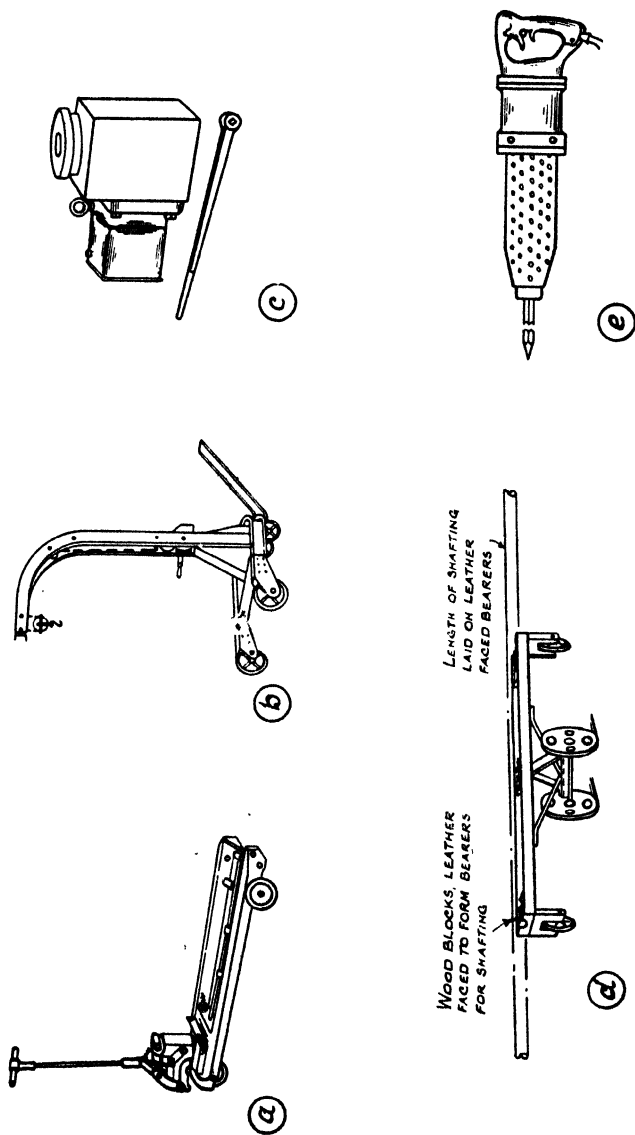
USEFUL MILLWRIGHTING EQUIPMENT
